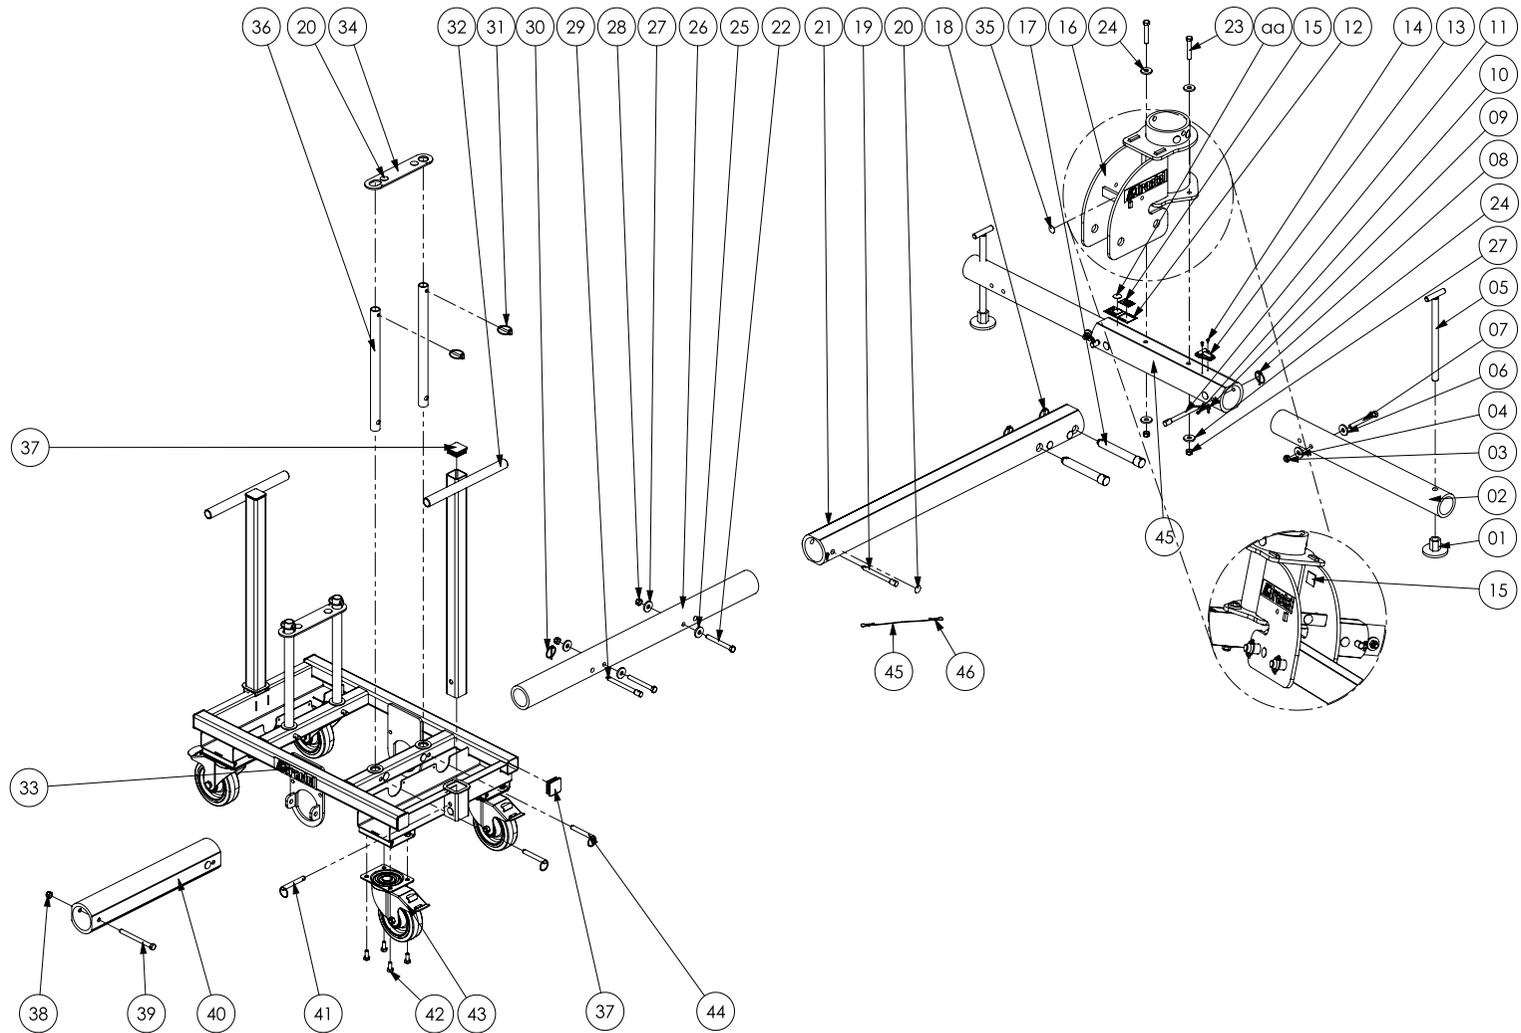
Exploded view – Davitrac self-stabilising base marking
